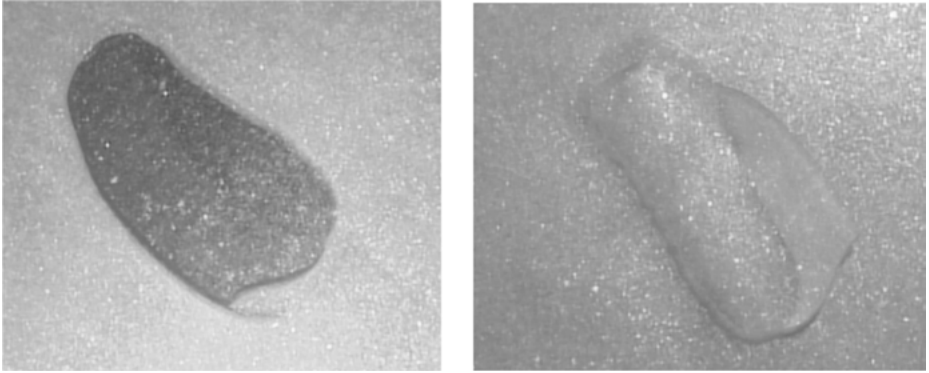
Hole caused by internal stuck. The right-hand photograph shows the piece of rubber pulled out of the hole, still stuck to the rubber film.
